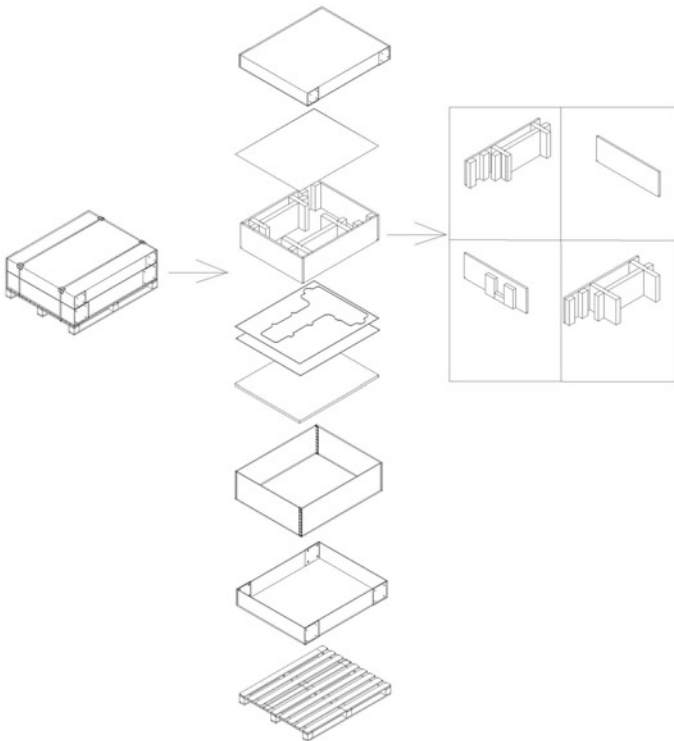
The dimensional assembly drawing of large lithium battery transport package
